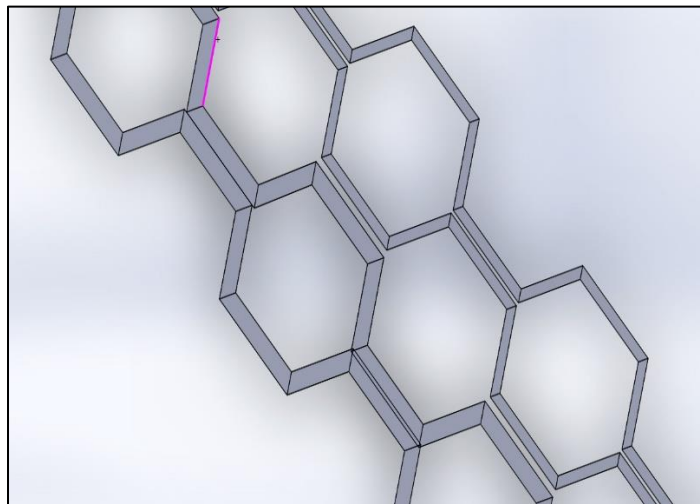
Solidworks<sup>©</sup> sketch using G-code of the printer toolpath
